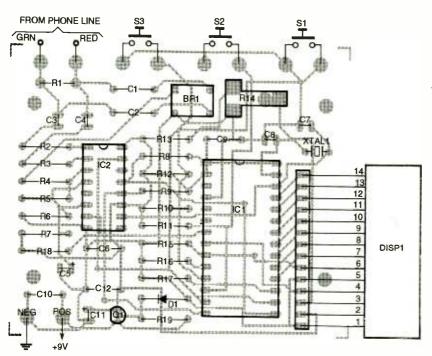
PARTS-PLACEMENT DIAGRAM. The 14-conductor ribbon cable that should be used to connect the display module to Pin 1 on the main board is indicated by a rectangular pad instead of a oval one.
